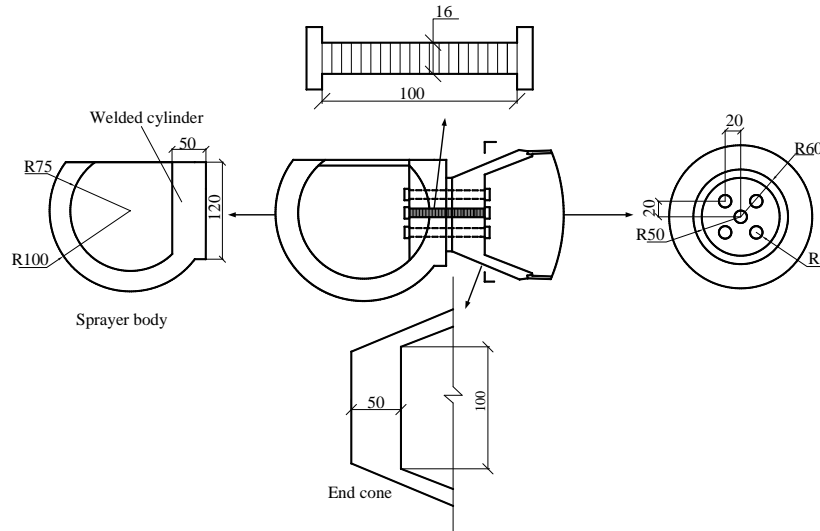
Assembly and configuration of the sprayer joint (unit: mm)
